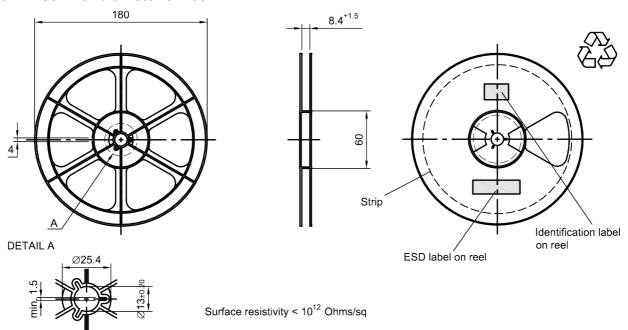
Drawing of reel (first-angle projection) with diameter of 180 mm.
